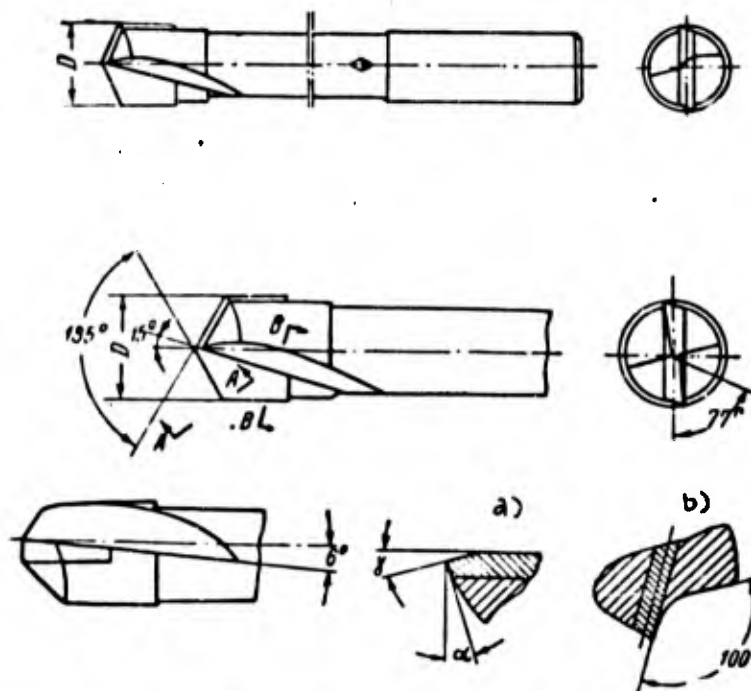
Design of Oblique-Flute Carbide-Tipped Drills, $D = 11$ to 20 mm
